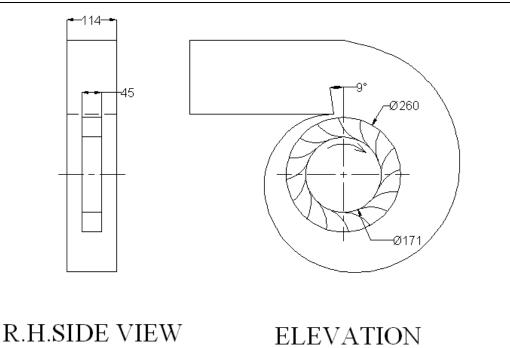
Impeller and Volute Casing Assembly as per Fundamental Design
